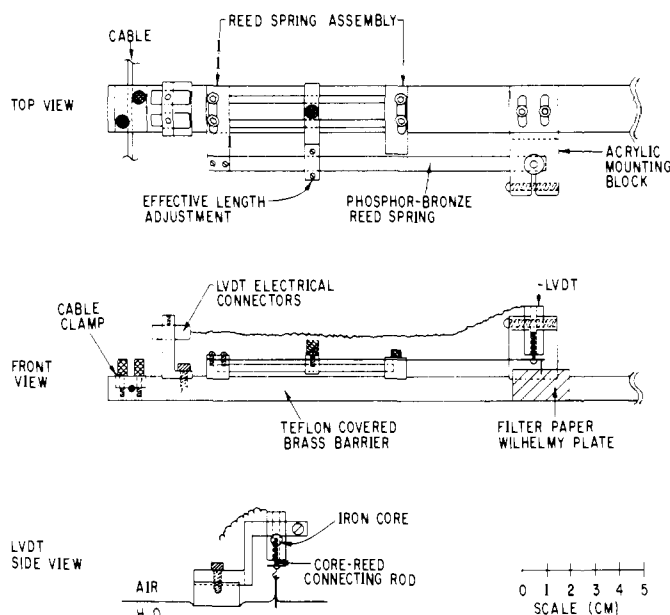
Detail of LVDT—Wilhelmy plate assembly.
